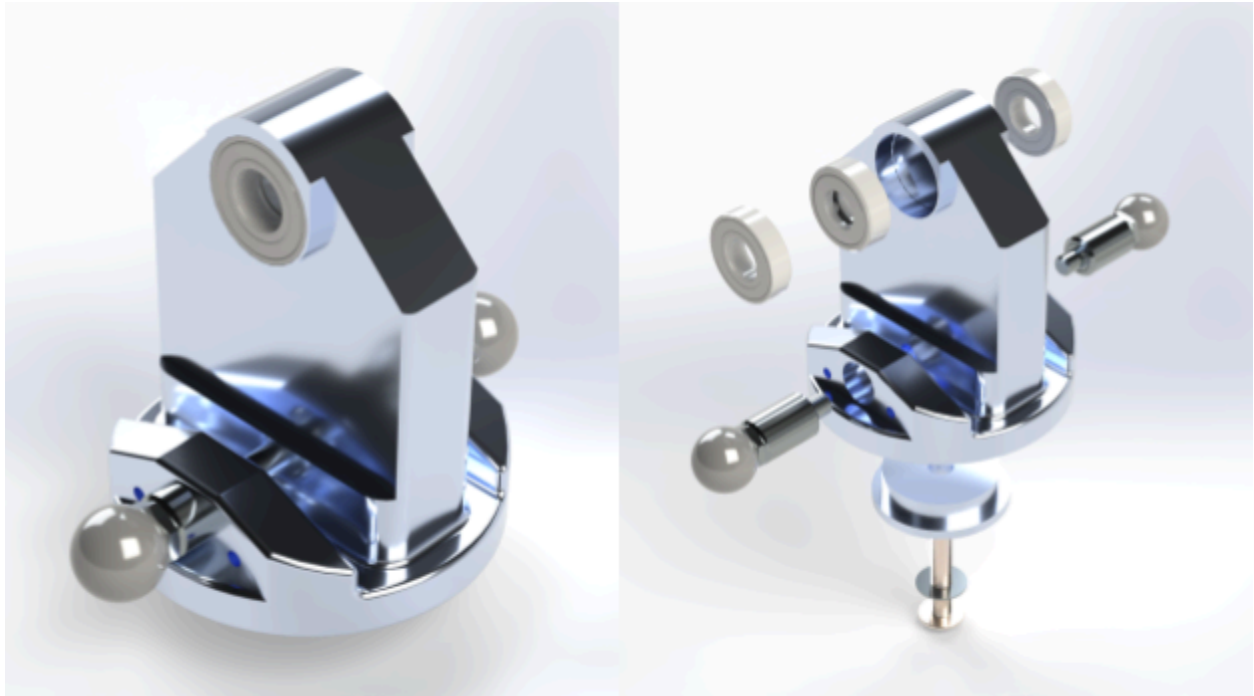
The pop-pin subassembly render (Solidworks Visualize) [4]
